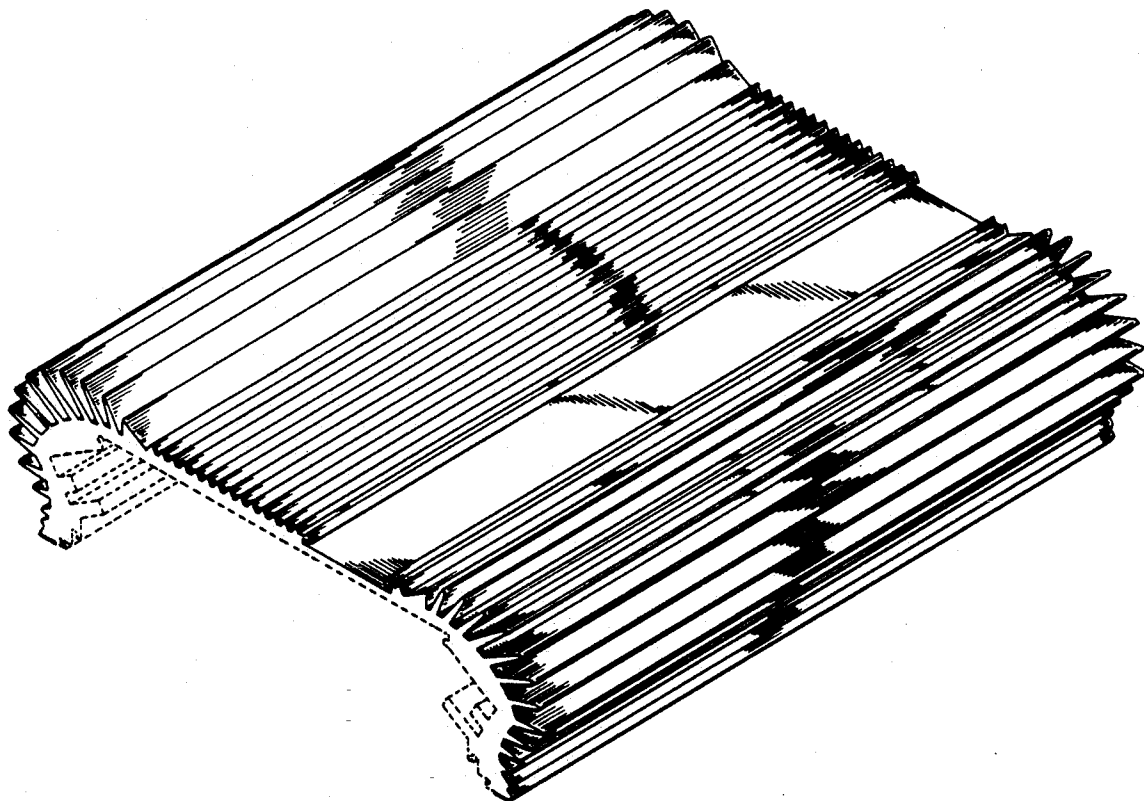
is a perspective view of an exterior surface of a heat sink embodying my new design;
